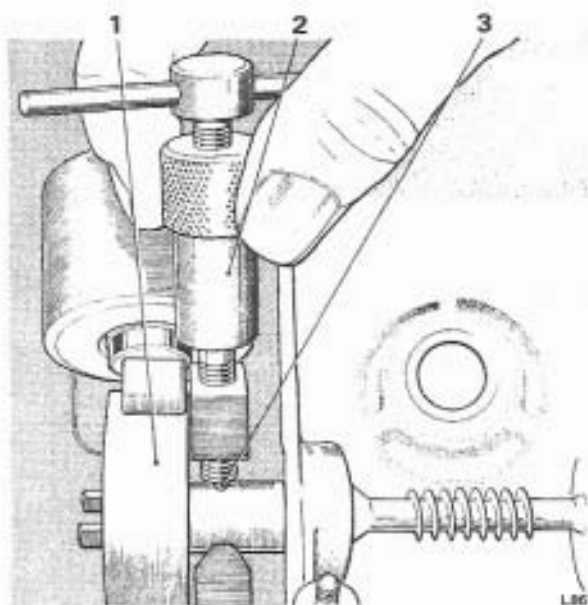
FITTING THE BRAKE DRUM ROLL PIN
